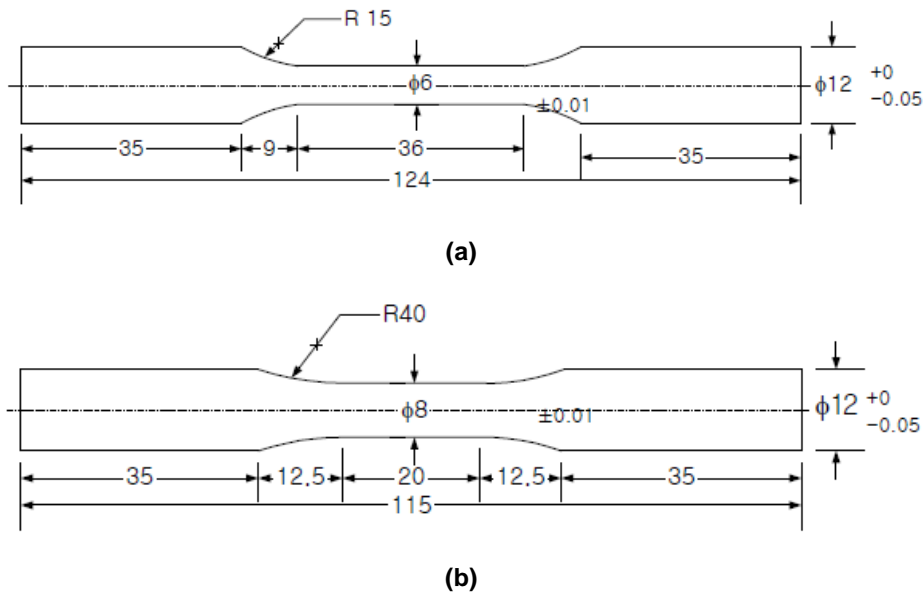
Testing specimens (a) tensile and (b) Low-cycle fatigue specimen (dimensions are in mm)
